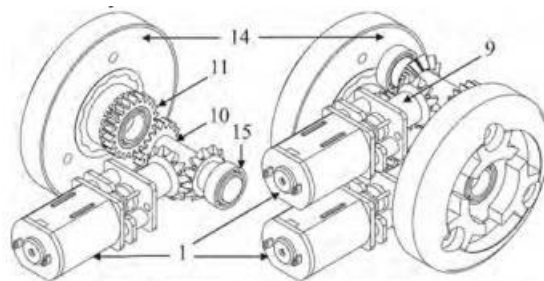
Transmission System & Motor Layout of Magnetic Locomotion In-Pipe Robot, with Part No; 1: Motor, 9: Gear, 10: Driving Shaft, 11: Wheel Gear, 14: Magnetic Wheel
